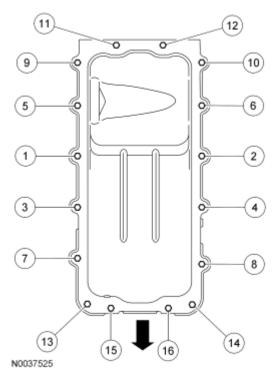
Oil Pan Bolts Removal Sequence Courtesy of FORD MOTOR CO.
